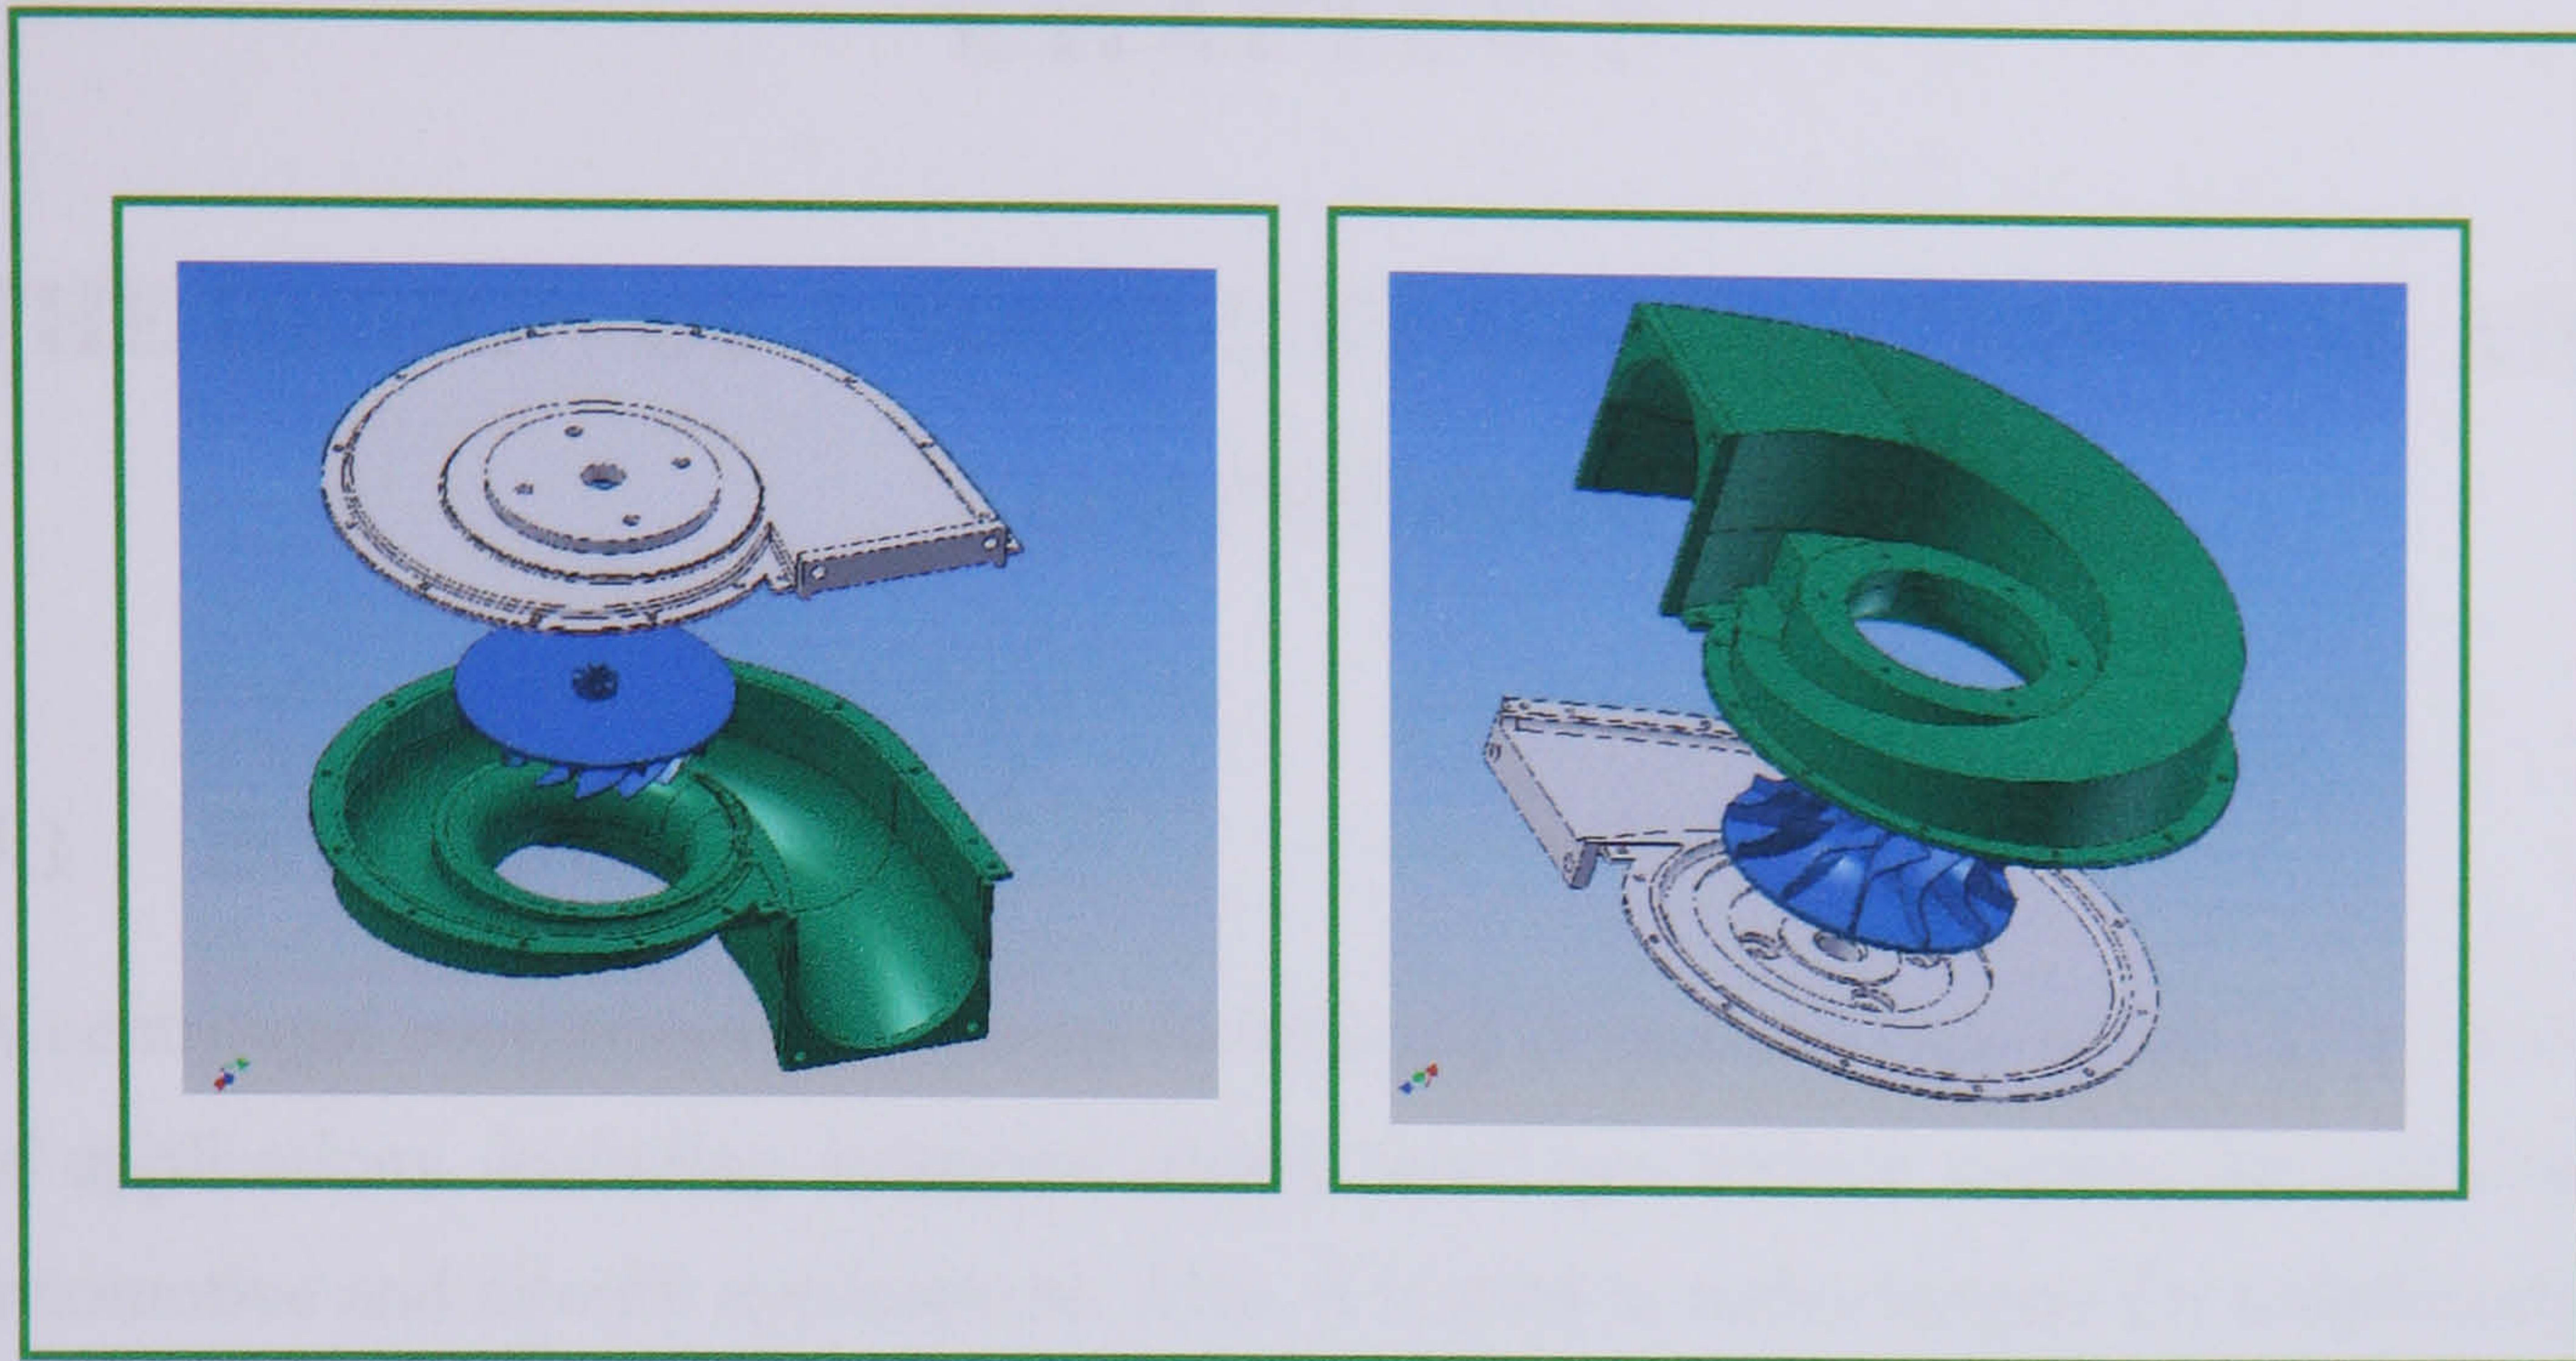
EXPLODED VIEWS OF THE SOLID MODEL OF THE IFR TURBINE ASSEMBLY
